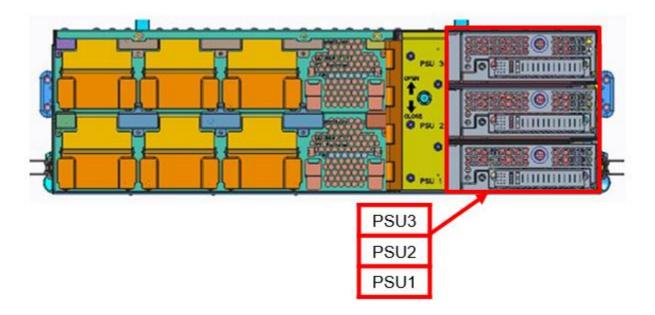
3U Chassis/System and PSU Layout (Rear View)
